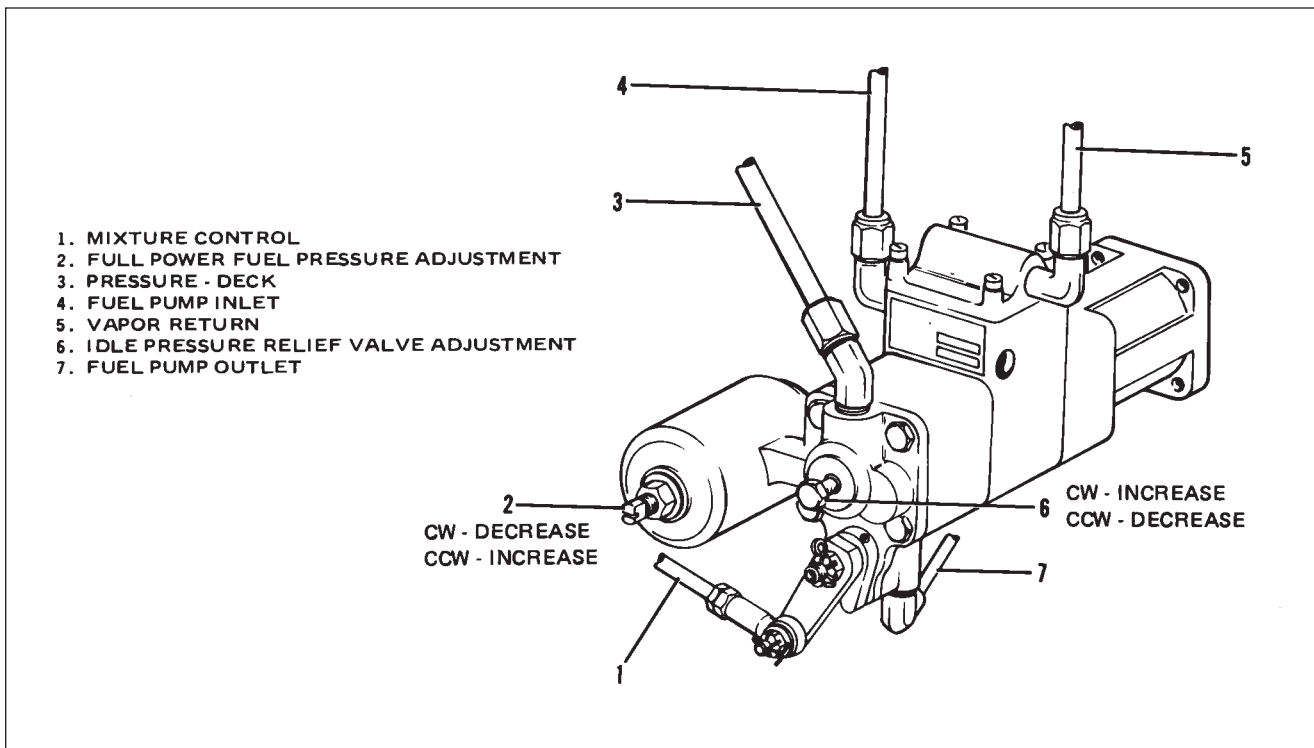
Sectional View of Altitude Compensating Fuel Pump Assembly
